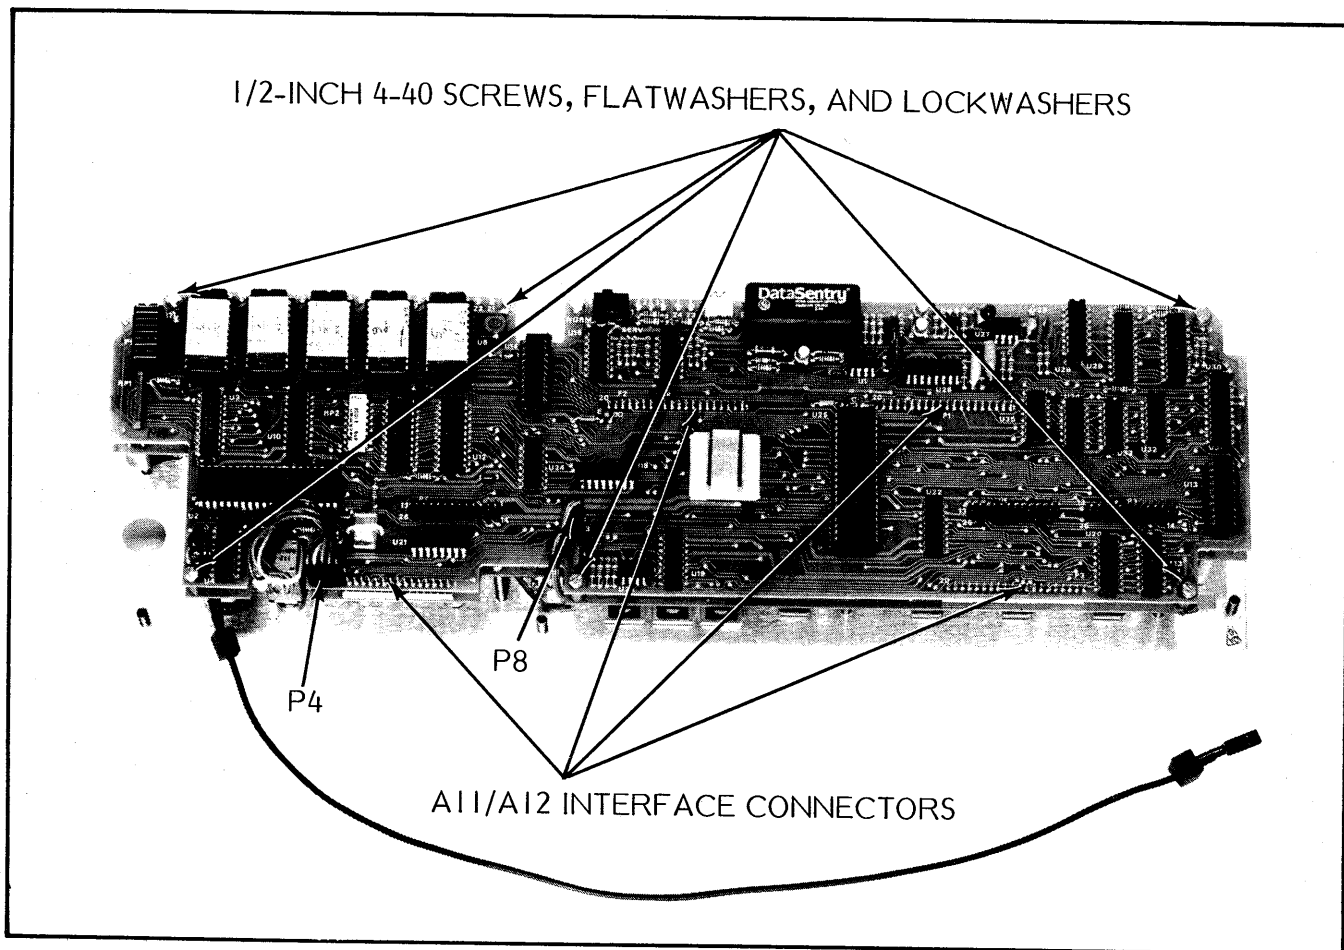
6600A Series Programmable Sweep Generator, Front Panel Assembly
